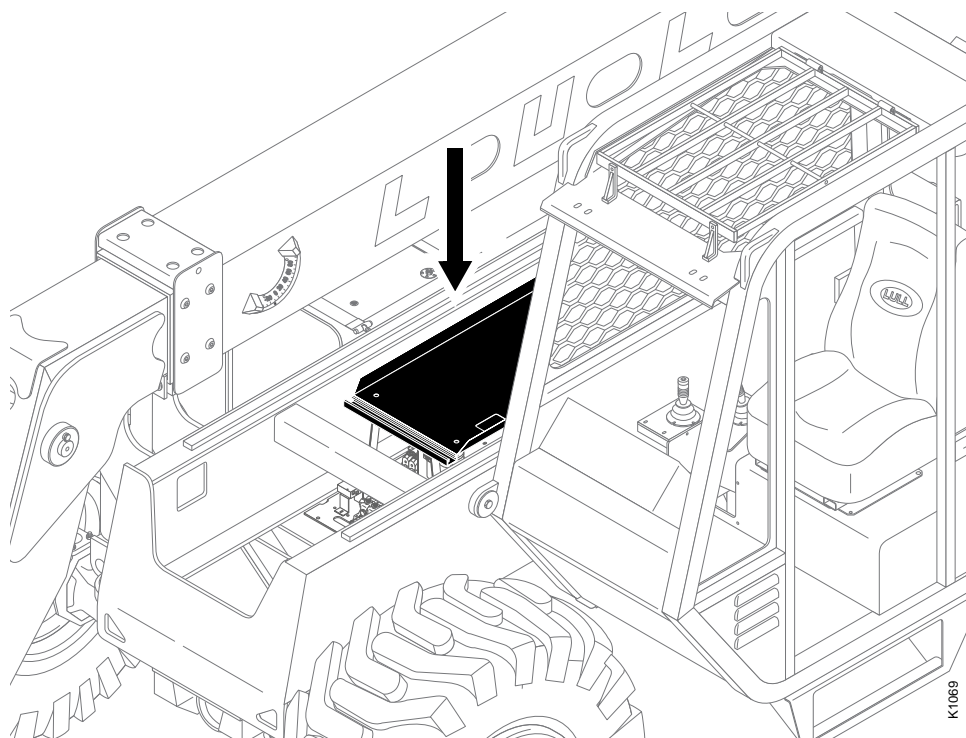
Roll-Back Hose Frame Location - Control Manifold Hydraulics
